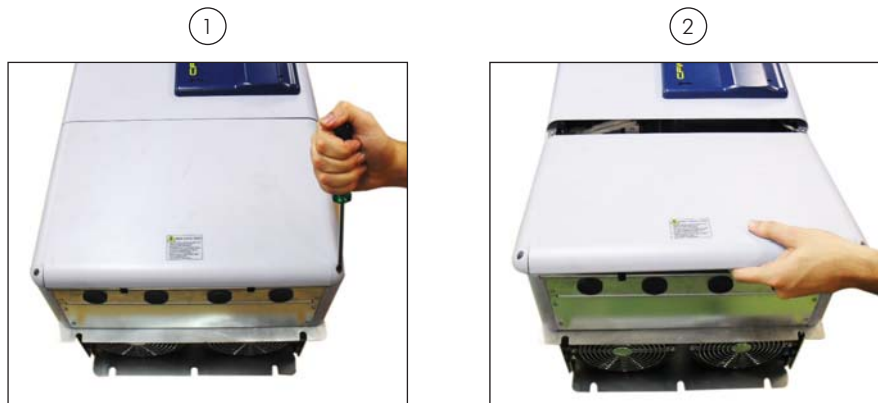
Removal of the bottom front cover, to access to the power supply and motor connection terminals
